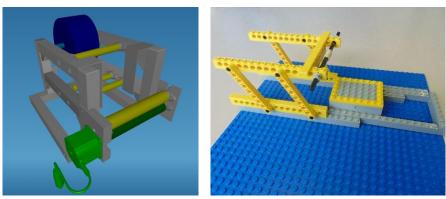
On the left CAD prototype, on the right LEGO prototype.
